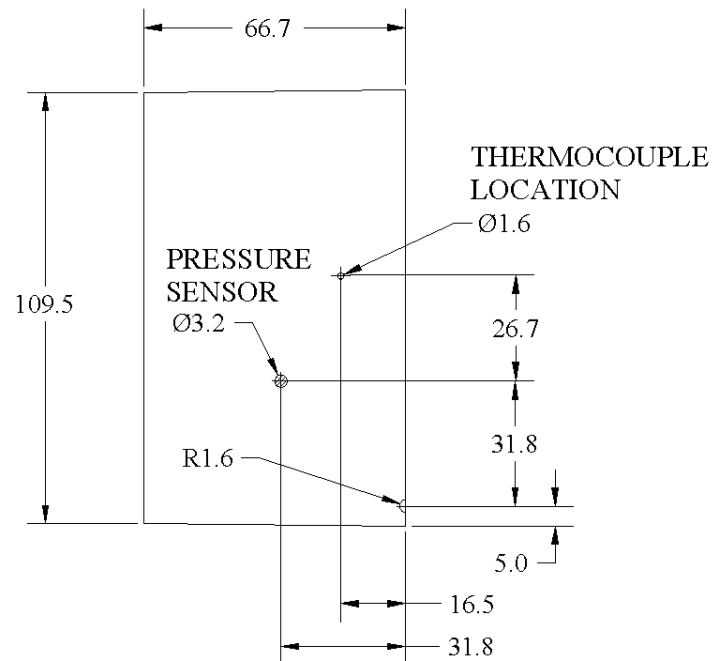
Schematic of the steel face of the mold cavity showing the in-mold sensors. One pressure sensor is located at the gate on a perpendicular wall and the other is located as shown here. The in-mold thermocouple is located as shown. The thermocouple is 6mm below the cavity surface. All dimensions are in millimeters.
